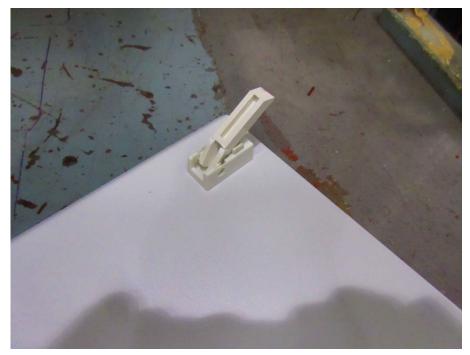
Post-Test Inspection. EUT 5. Case Feet - Shows the cracked foot
